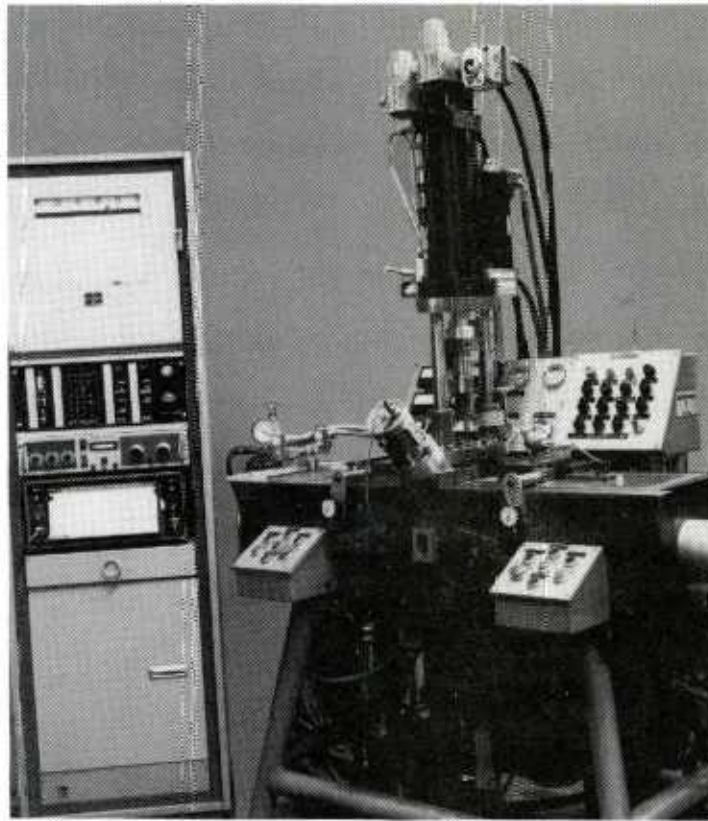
Isothermal Roll Forging Machine (#79-5315)
